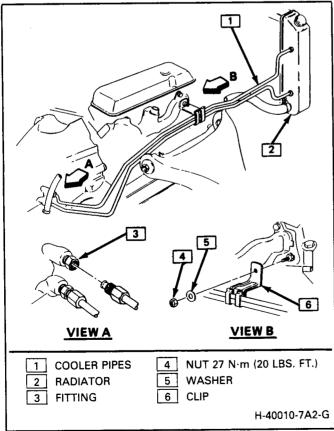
Oil Cooler Pipe Routing LD5 VIN A (LV2 VIN Y Similar)
